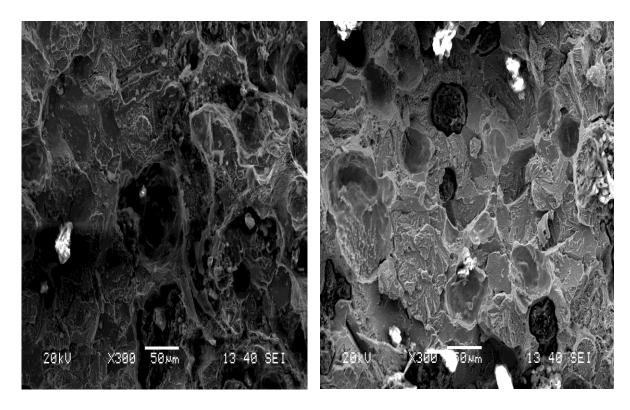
Fracture surface of Specimen, Tempered at 400°C and held 1hr.
